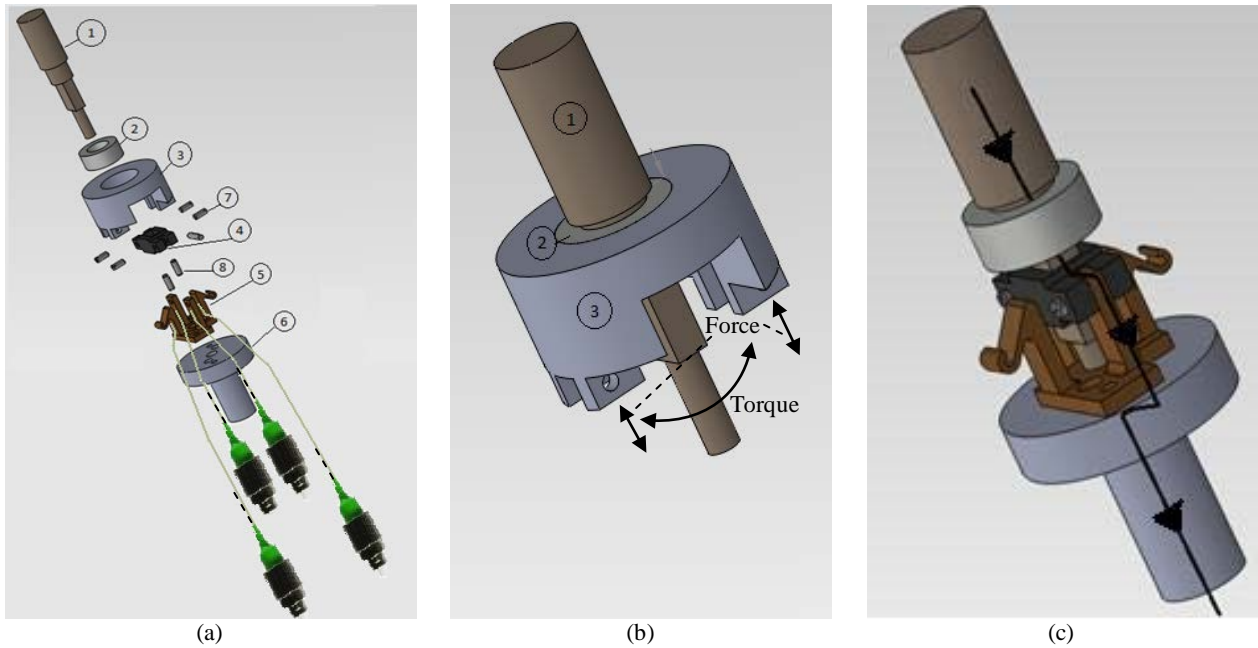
Modified sensor with axial FBG installation configuration: (a) exploded view, (b) ball bearing (part 2) connects part1 to part 3 with minimum friction thus decoupling force and torque measurement, and (c) the solid line shows how the torque flows from part1 to part6. (1- square cross section shaft for torque transmitting; 2- ball bearing; 3- part for transmitting axial force; 4- part for transmitting axial torque; 5- active element for axial force and torque; 6- base and shaft).
